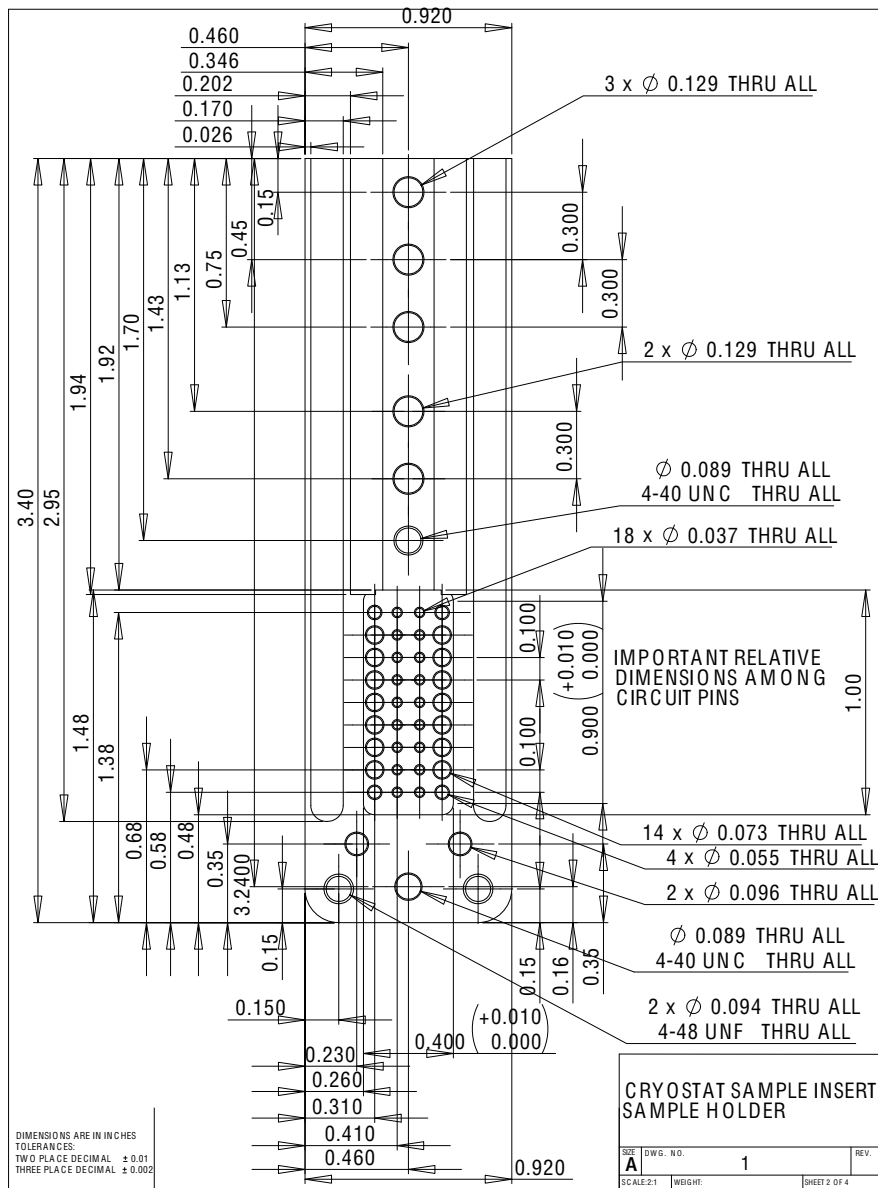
Example machine drawing sheet for the sample holder plate, one of several for that particular machine part, illustrating the degree of design detail and tolerances required to fit the required features into the space constraints. Complete machine drawings for all parts are in Appendix A.
